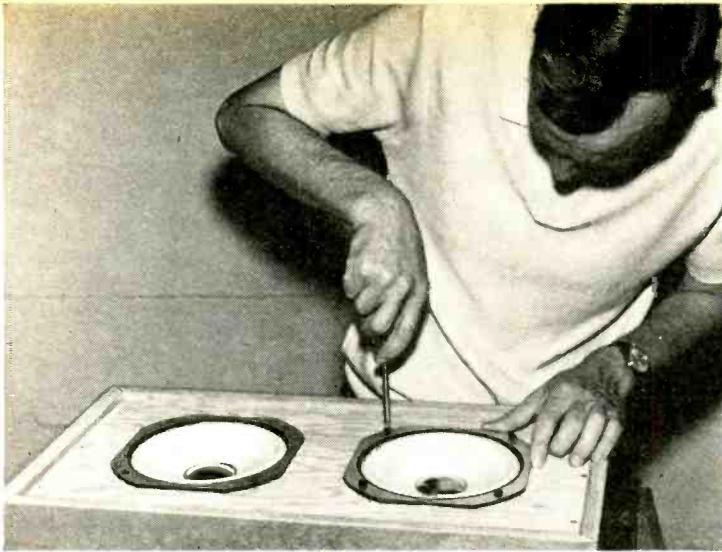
T-nuts and machine screws are provided to facilitate passive radiator and loudspeaker mounting. Note that the LE8T and PR8 are designed for mounting through the front of the speaker mounting board.
